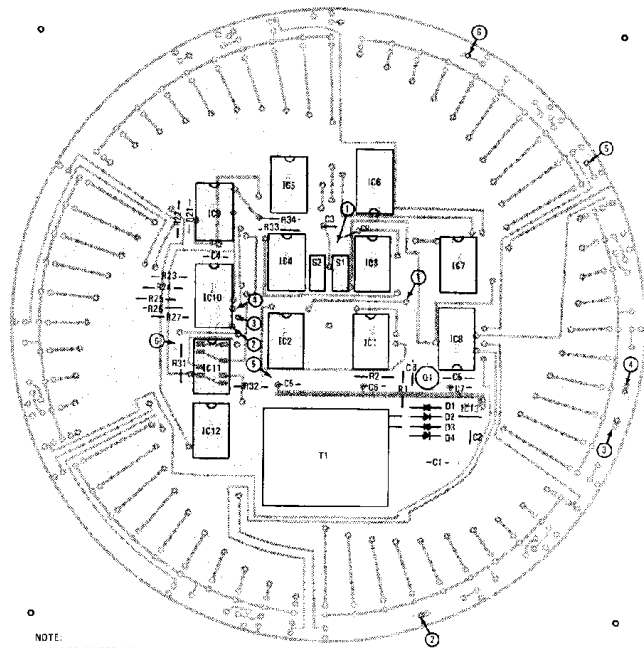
COMPONENT PLACEMENT for rear of PC board.
